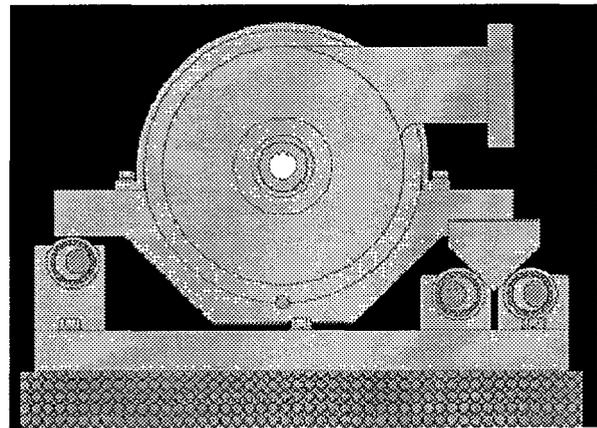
Structure positioning mount with roller cams. Rotation of the eccentric camshaft shifts the accelerator structure position [14].
